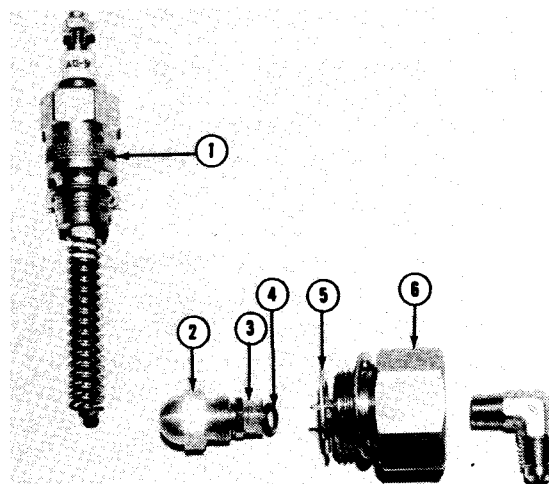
, (N21019). Glow plug preheater adapter spray nozzle
